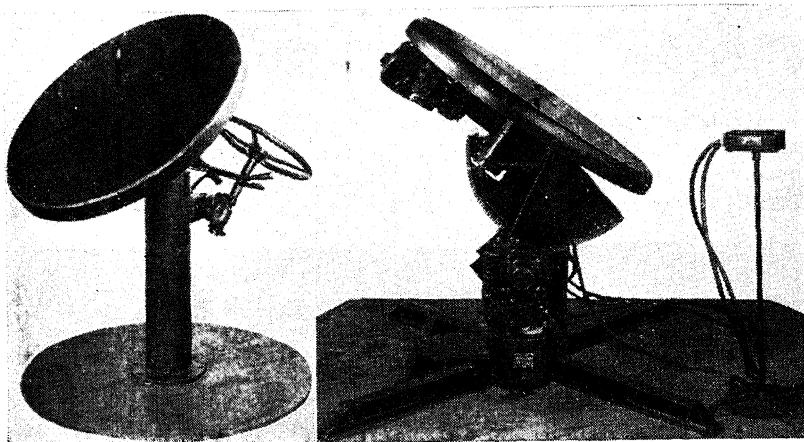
Left: Hand-operated welding work positioner. Right: Motor-operated work positioner with push-button control and automatic limit switch cut-off. Note all-welded steel construction.
